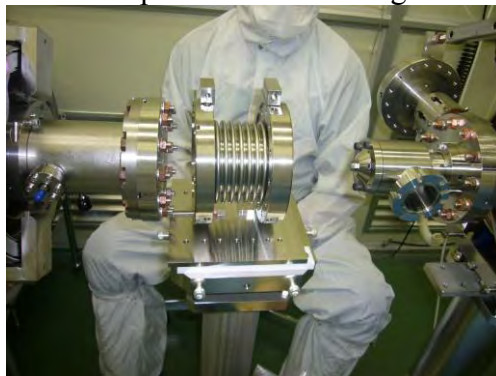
2 DESY cavities assembled into a string with interconnecting bellows.
